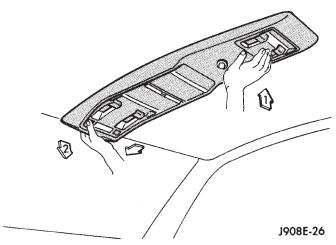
Remove/Install Overhead Console and compass (Figs. 7 and 8).
